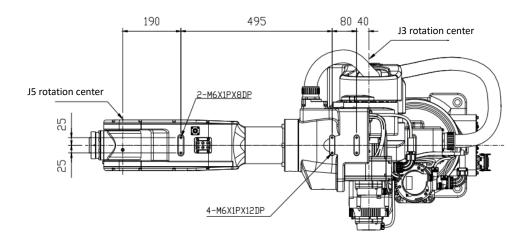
Mounting surfaces on the robot arm (RA620-1739)
